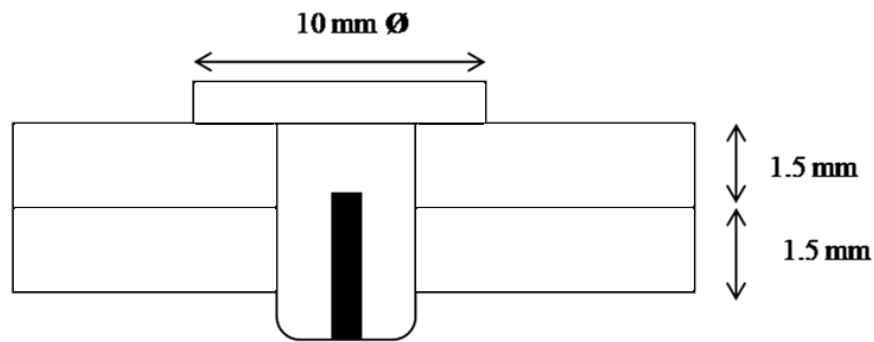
The sketch of the rivet inserted into the two pieces of aluminium sheet material
